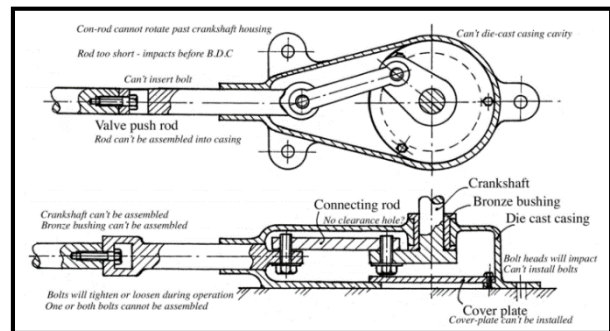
Showing assembly drawing that is impossible to manufacture and will not function as required (italicized text) [1].
